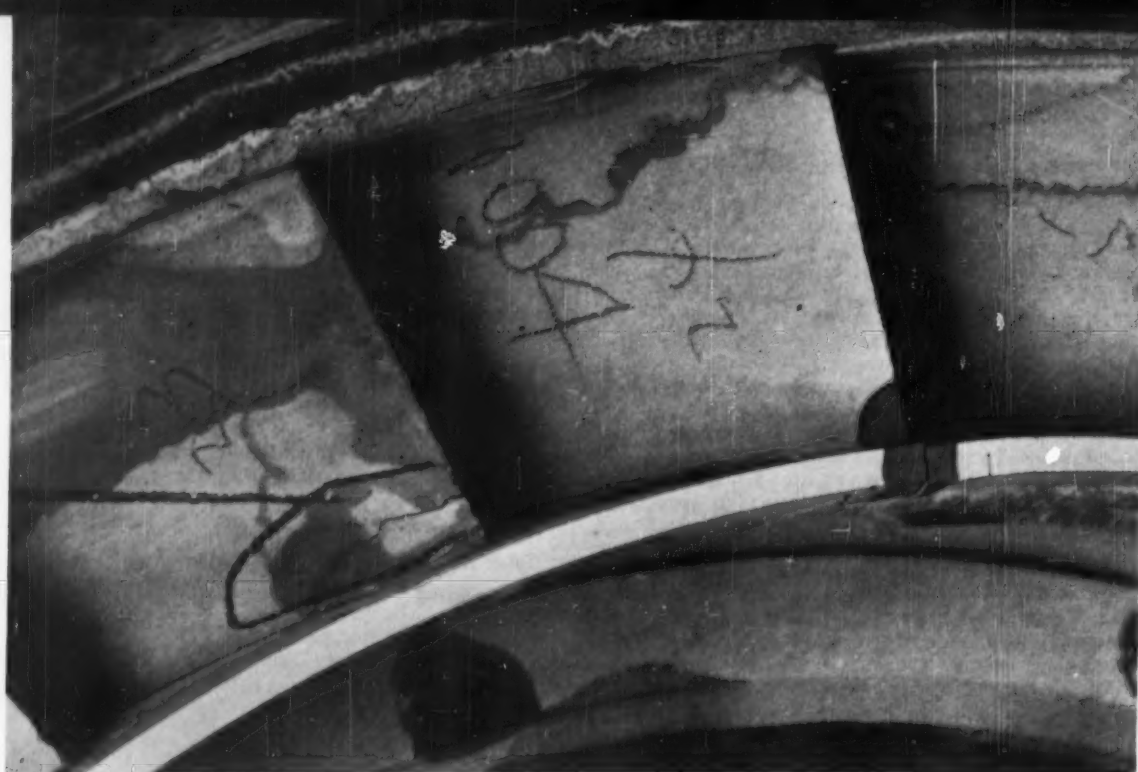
Cracks are shown in the inner ring and the downstream vane of the first-stage turbine nozzle of engine 1004
